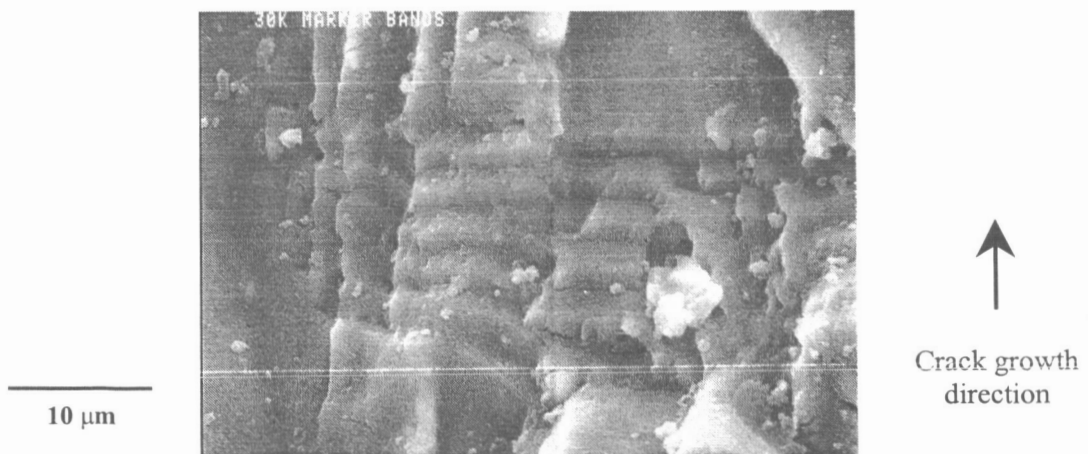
The micrograph shows a markerband from a fatigue crack surface in panel 1. This markerband locates the crack front at 30,000 pressure cycles.
